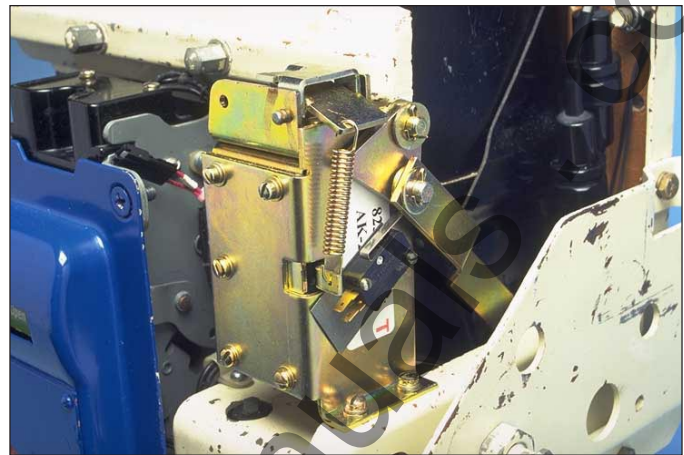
Reset Arm Attached to the DTA Reset Cam Assembly
